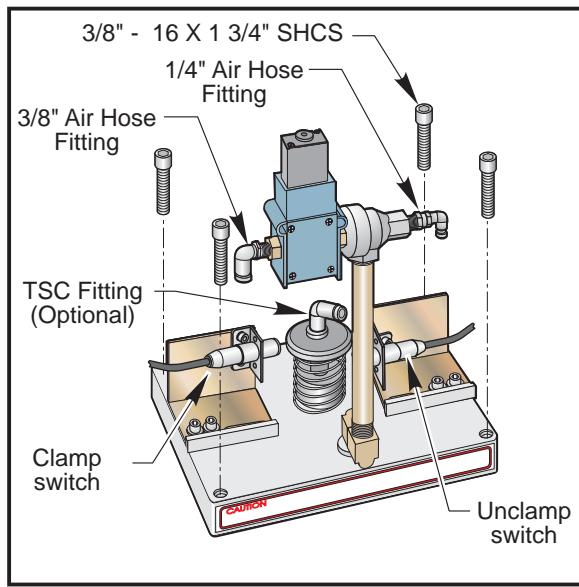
Tool release piston assembly with air solenoid assembly.
